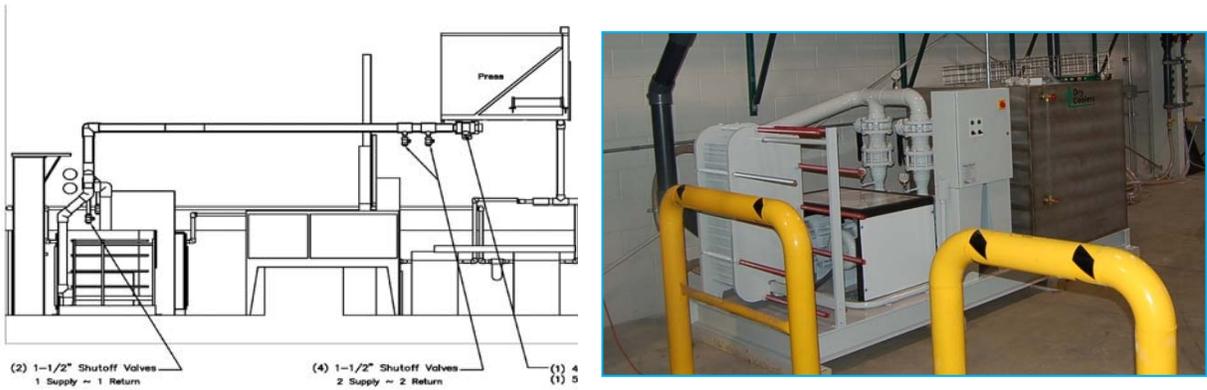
Schematic and picture of the coolant system for delivering coolant to the coil and the power supply
